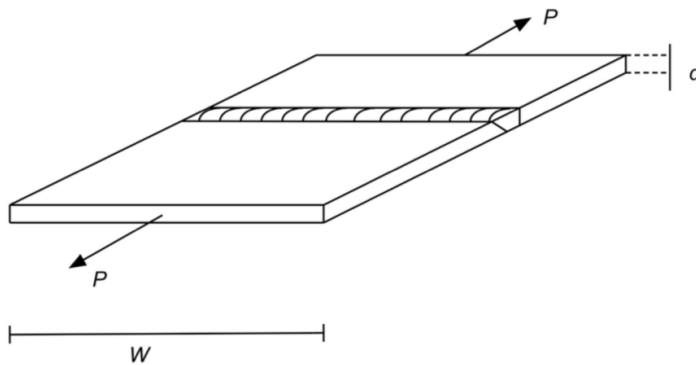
Loading perpendicular to the weld [40].
